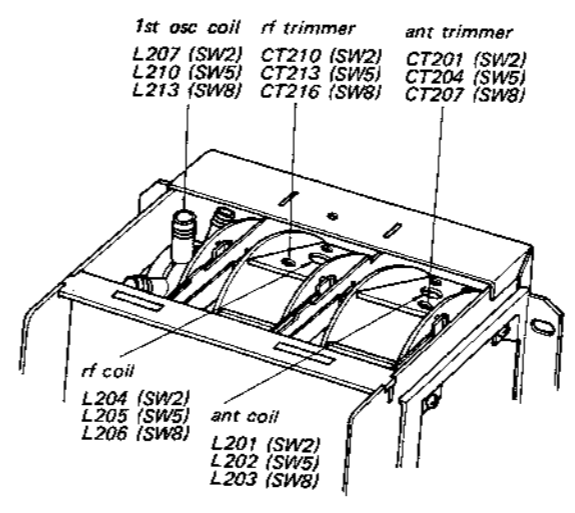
Adjusting parts for SW2, SW6, SW8
